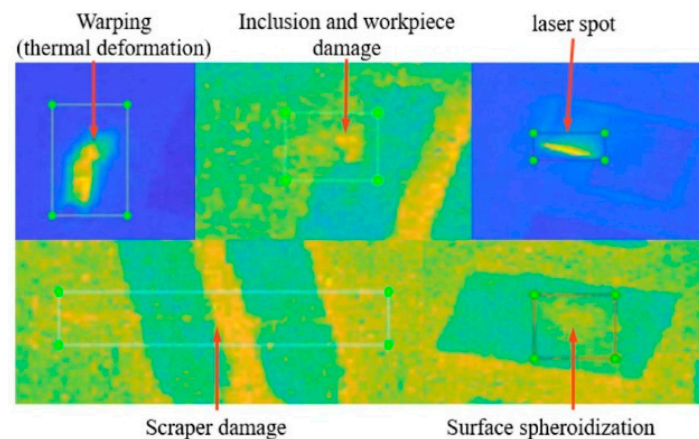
IR camera imaging highlights the location and shape of various defects [155].
